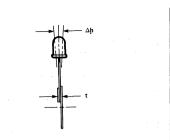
Front to Rear Alignment and Tape Thickness, Typical All Device Types
